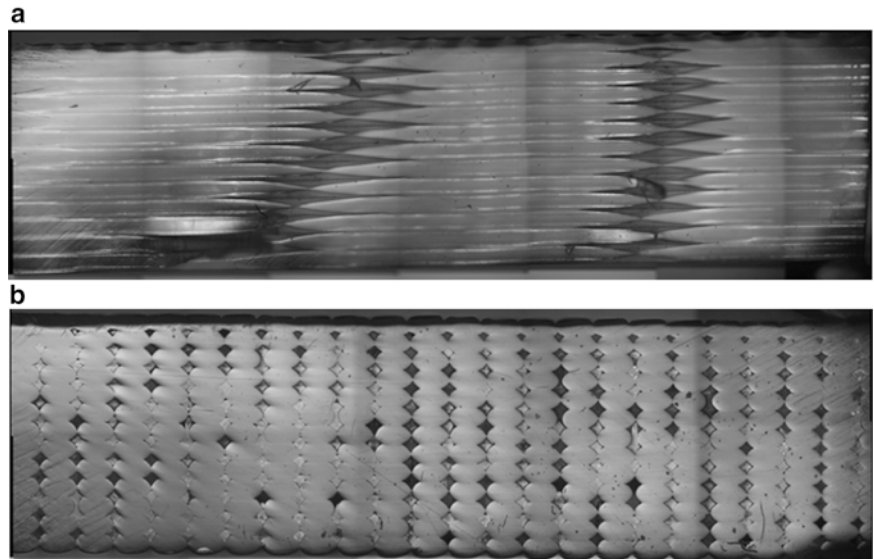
(a) Longitudinal, and (b) transverse cross-sections of “nominal” road density specimen
